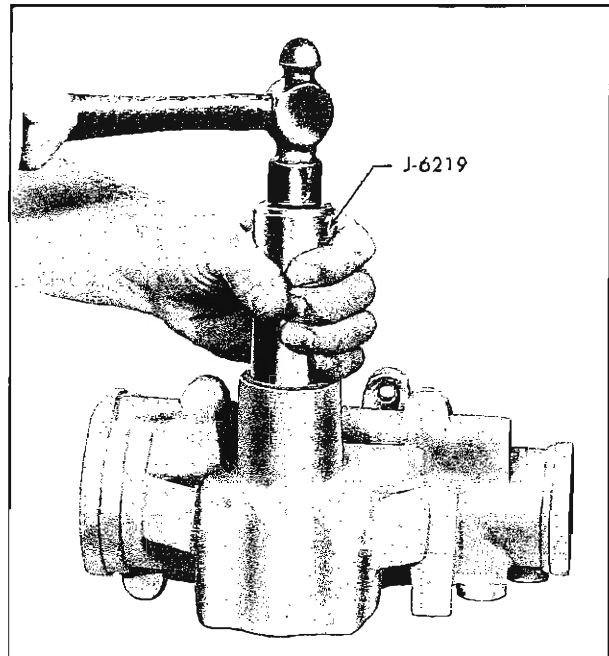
A-24 Installing Pitman Shaft Seals Using J-6219
